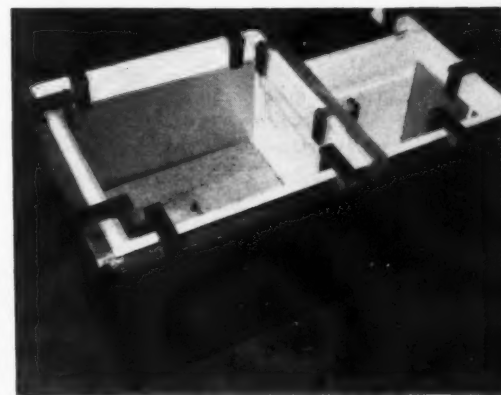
Formed refrigerator cabinet is placed in holding fixture and polyurethane foam is applied to joints.
